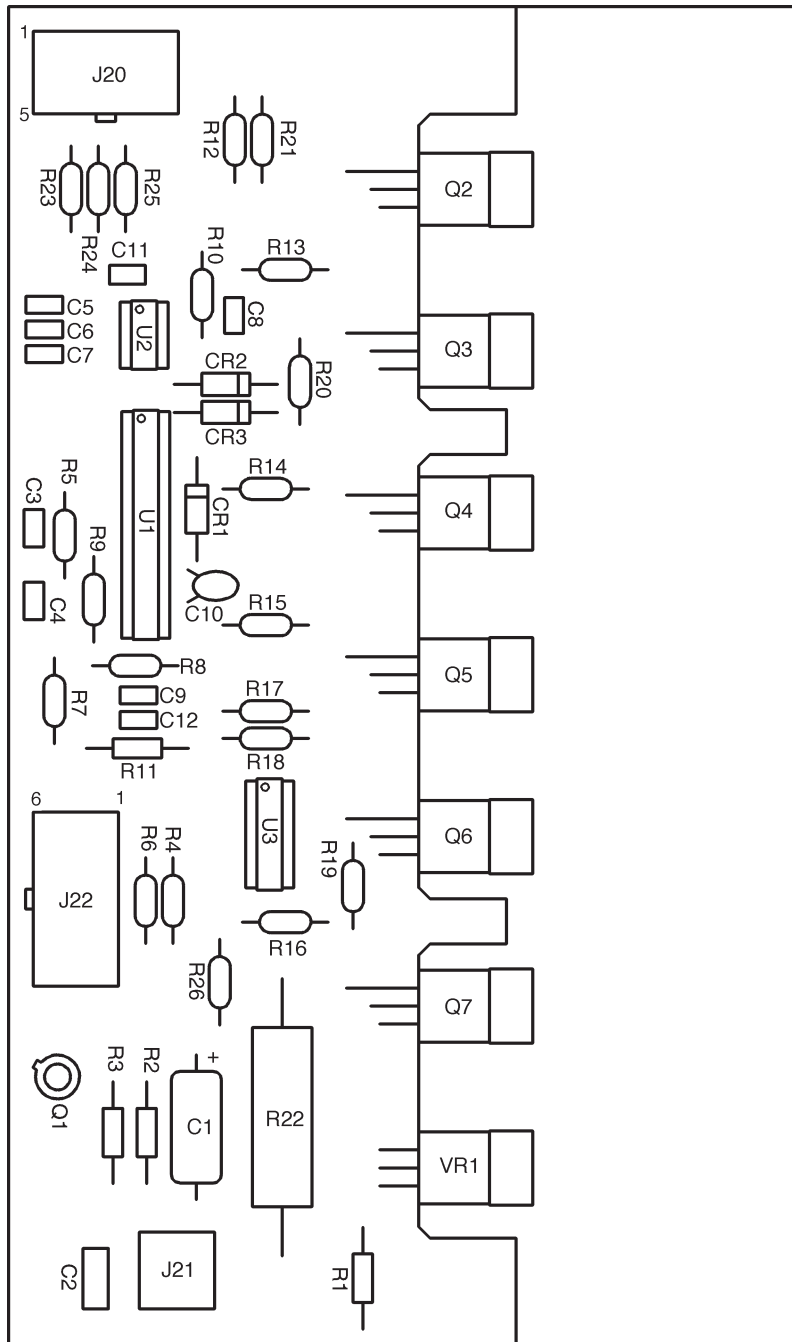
Motor Control Printed Circuit Board Assembly, PN 78230 Revision 4
